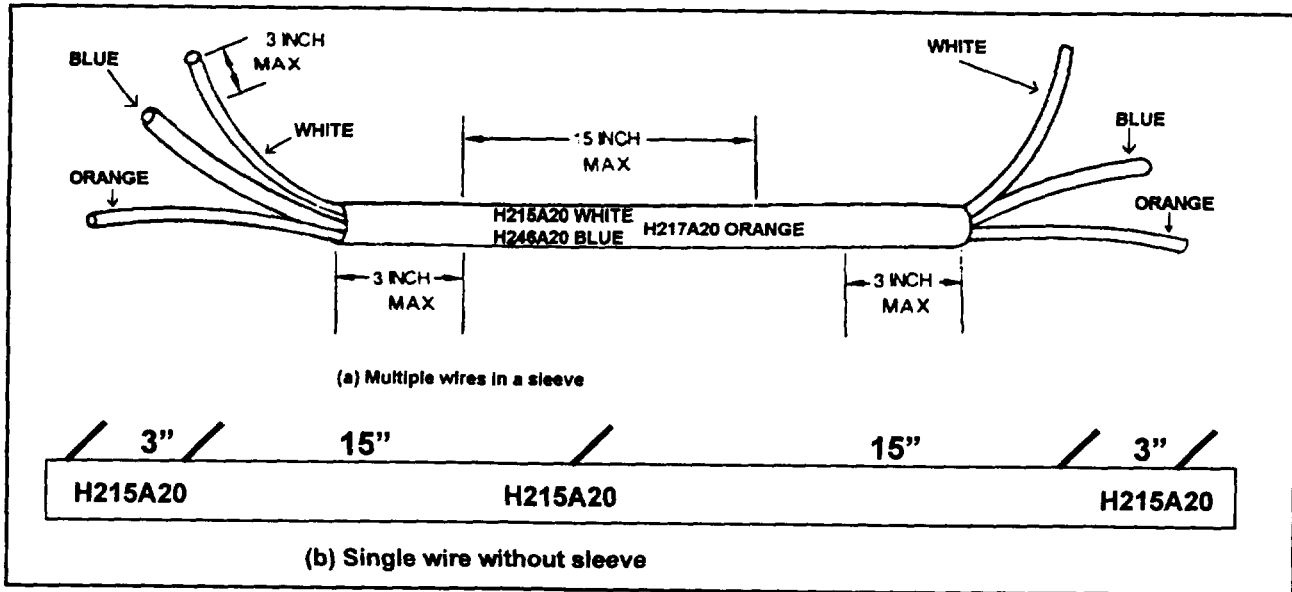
Spacing of printed identification marks (direct marking).
